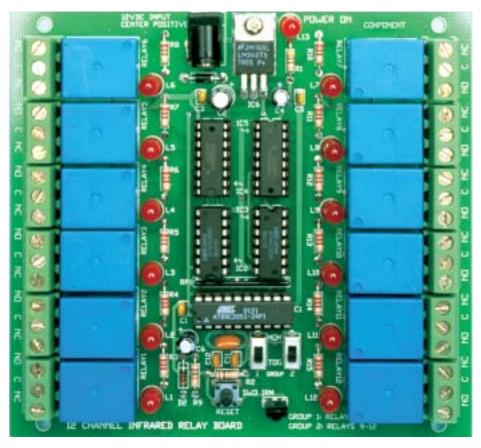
all components mount on the one PC board, shown above same size. It is a double-sided board but only the underside tracks have been shown, for clarity. Shown below is the same-size photograph of the board which should help you in assembly.
